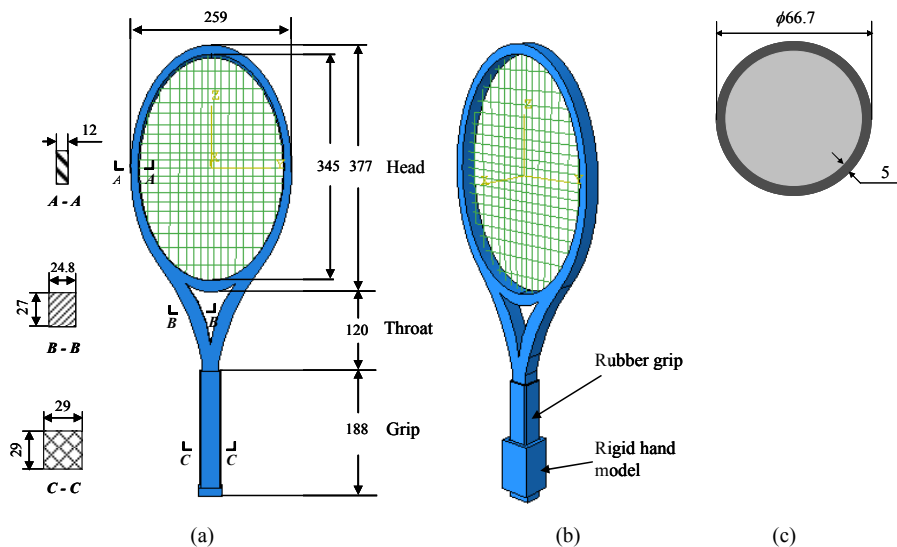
(a) Model without a rubber grip (b) Model with a rubber grip and rigid hand (c) Model of ball (dimensions are expressed in millimeters).
